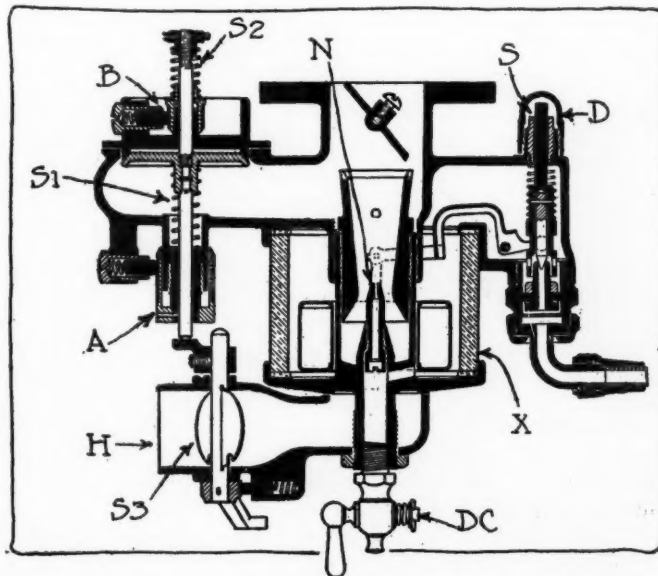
Sectional view of Stromberg Type B carbureter, showing adjusting points
